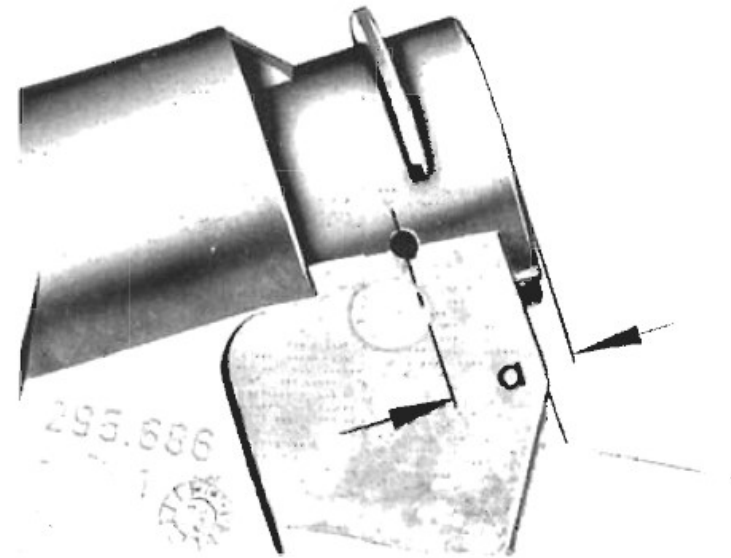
Location for hole in ignition switch housing. Dimension a is 13 mm (just over 1/2 in.).
